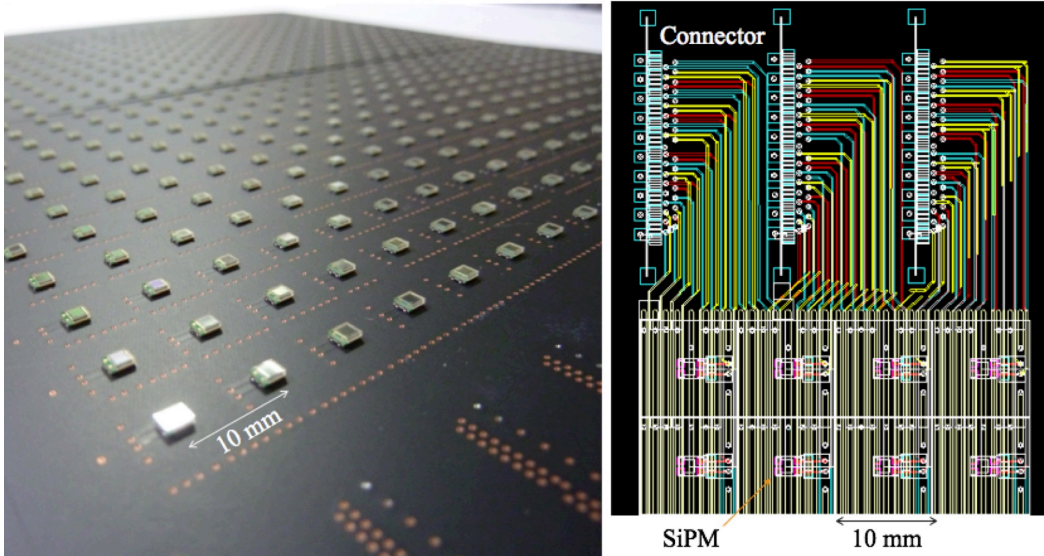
Printed circuit board for SiPM mount: (left) photograph of the circuit board after SiPM implementation; (right) partial drawing of the circuit board. The interval between the SiPMs is 10 mm.
